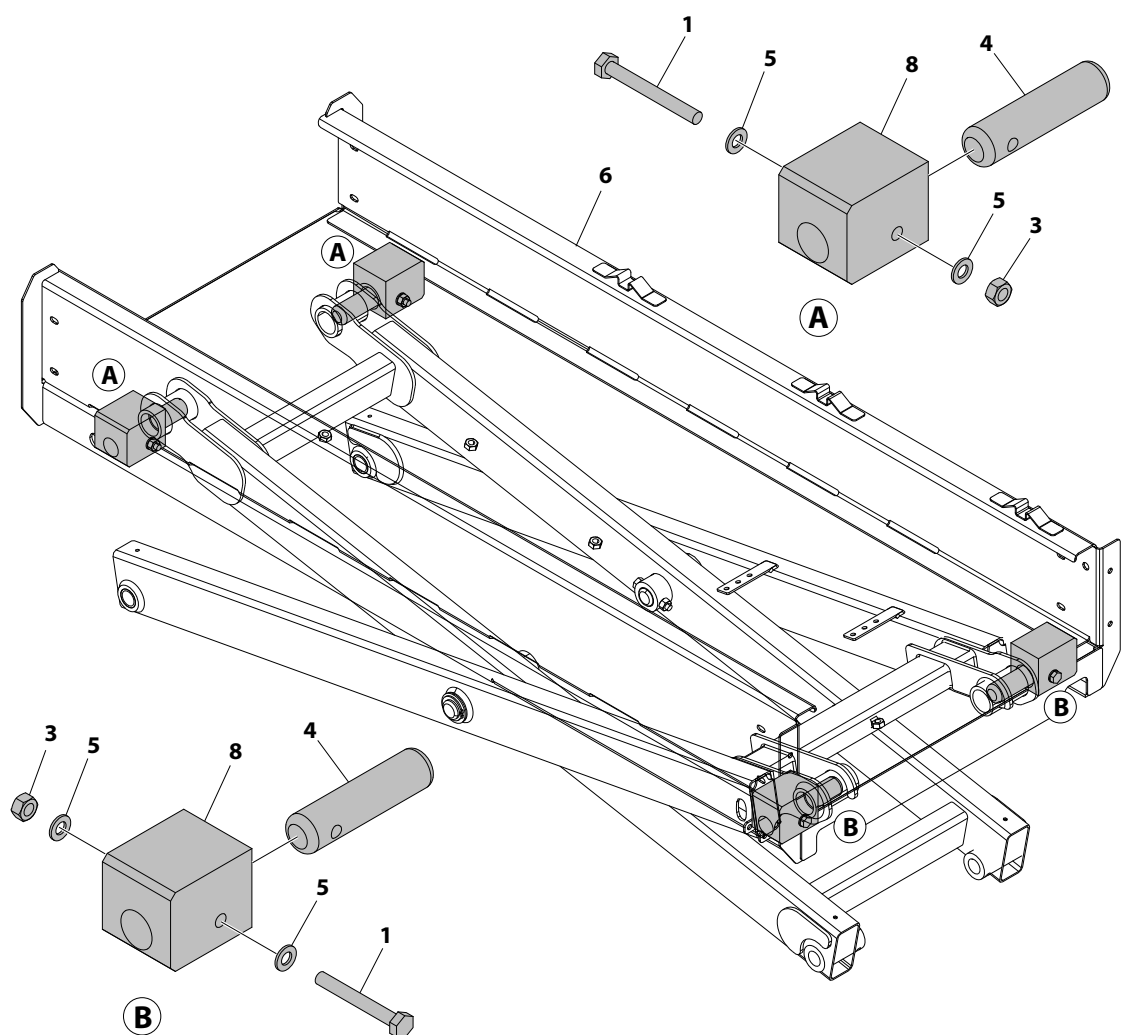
Platform Assembly (with LSS) - Installation/Removal
